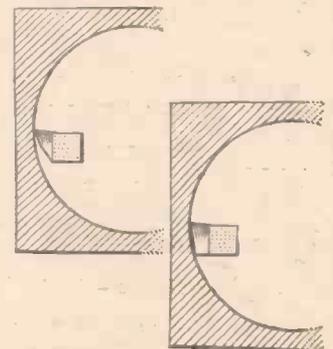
When using a boring bar see that the tool does not "double contact" with the bore. Grind a clearance, if necessary.
